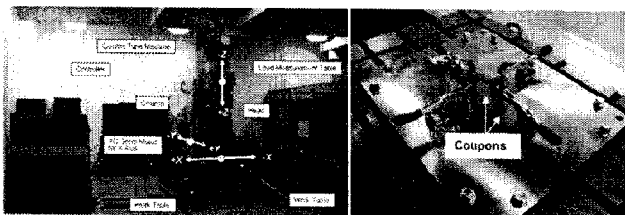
CNC controlled 3-D linear FSW system 'HitSpin type GR3DC5T' Welding jig with a coupon in a cross-tension configuration
